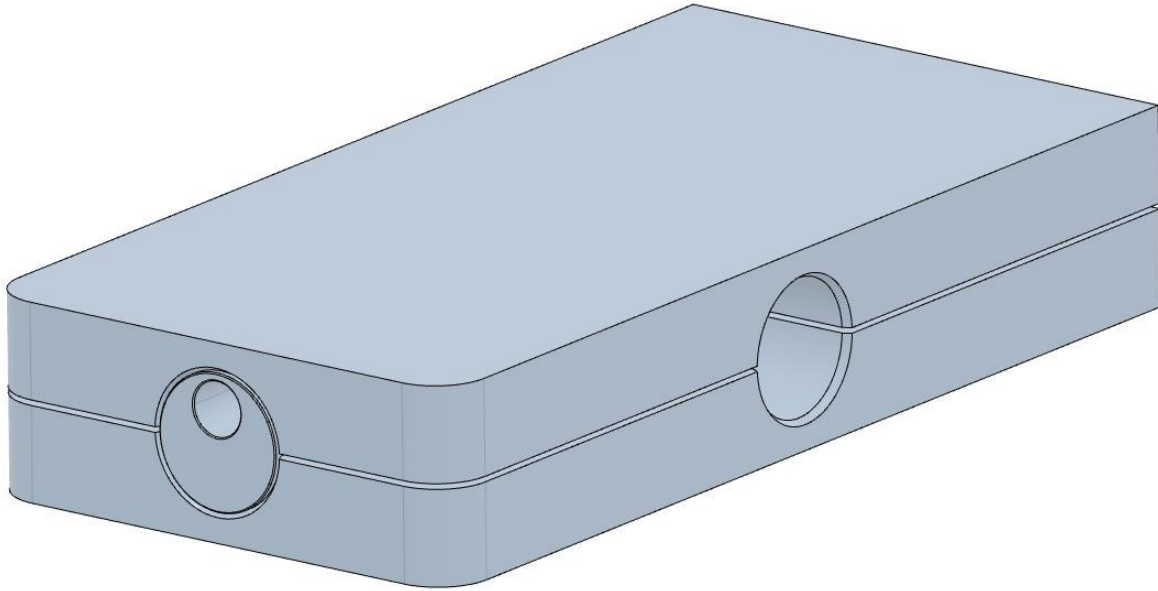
Concept 4 with cylindric "key" in one hole. The plates have the dimensions 400x200x35mm
